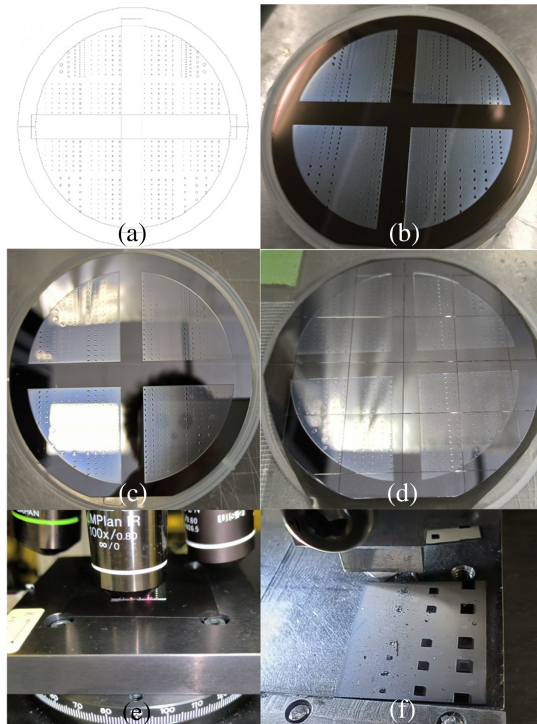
Photographs of the testing sample (a) Mask design; (b) Lithography; (c) DRIE and cleaning; (d) Dicing; (e) Stealth laser ablation; (f) Shear force test
